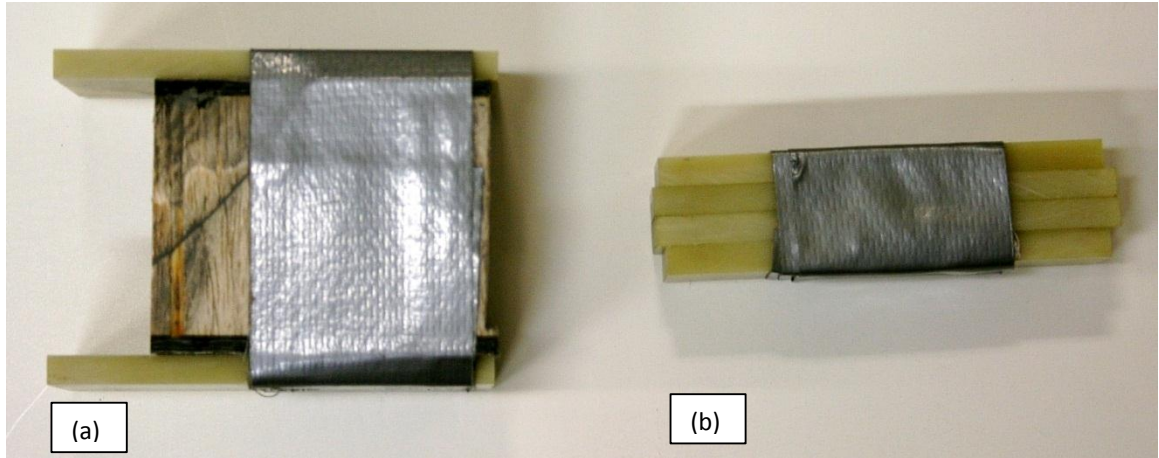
V-clamp spacers (a) sandwich beam (b) facesheet beam
